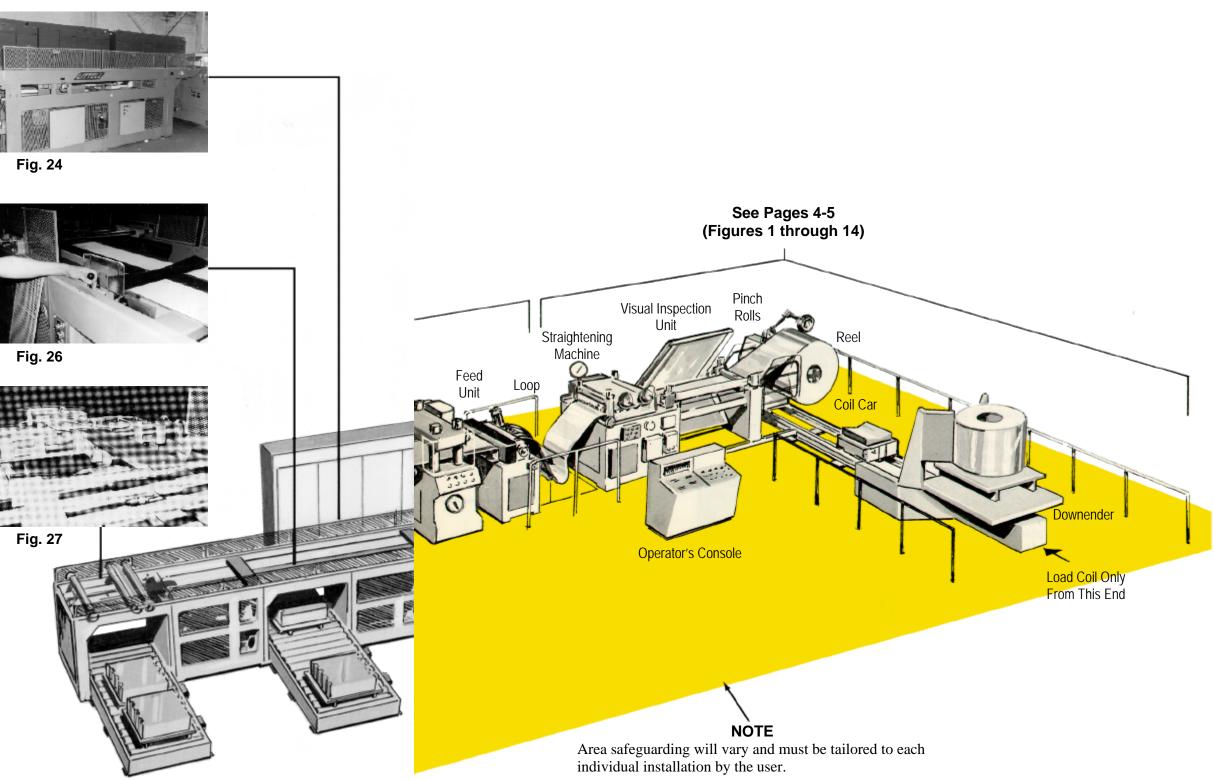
Expanded metal side barriers along entire length of conveyor and drive system restricts access to power transmission components, moving belts, and sharp edged sheets.
